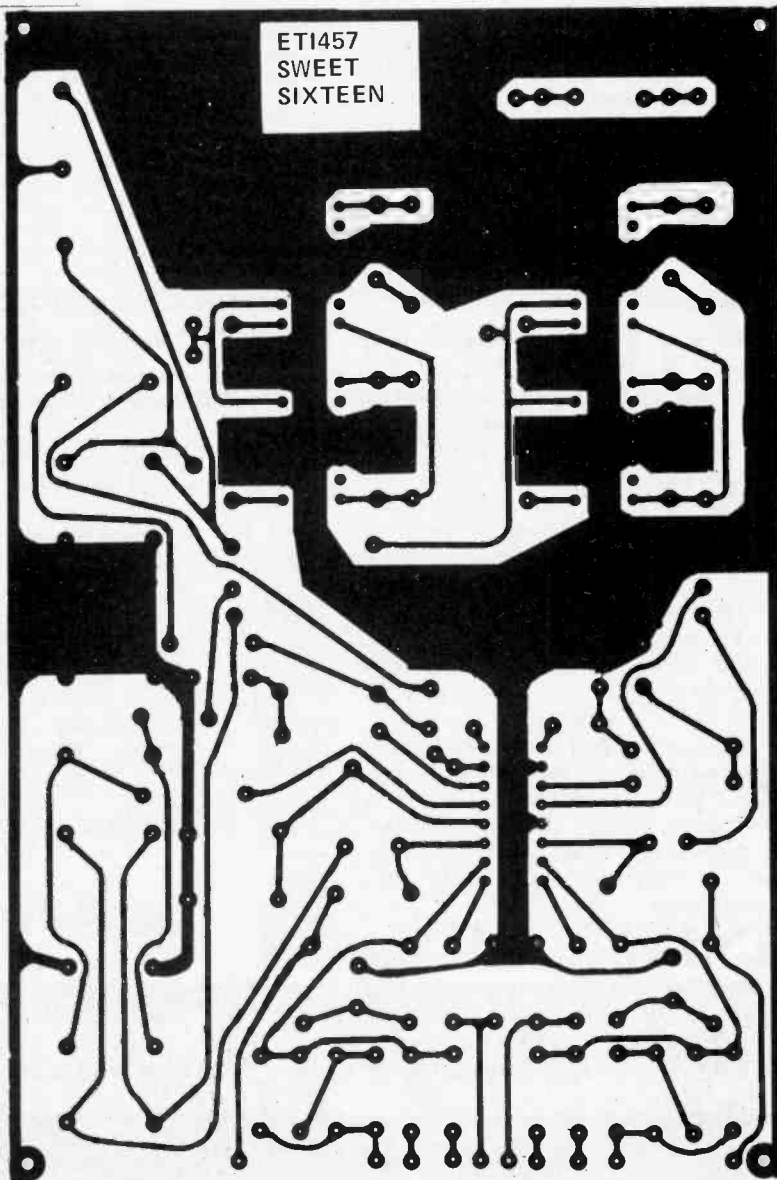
The P.C.B. design shown full size (6in x 4in).
